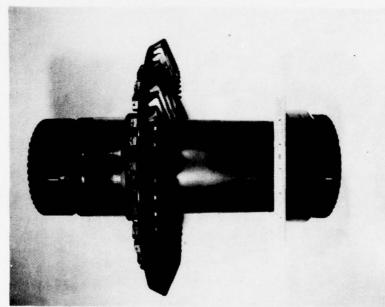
Main input gear and gearshaft after 54-minute loss-of-lube test of optimized transmission configuration number 2.
